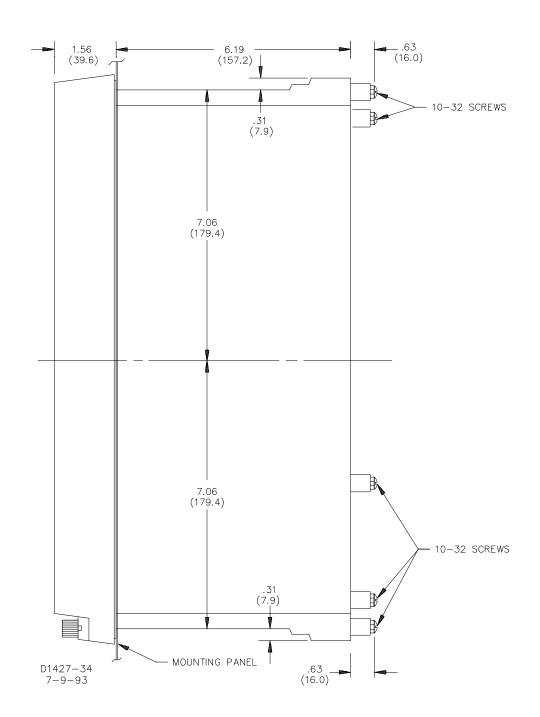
M1 Case, Double-Ended, Semi-Flush Mounting, Outline Dimensions, Side View
